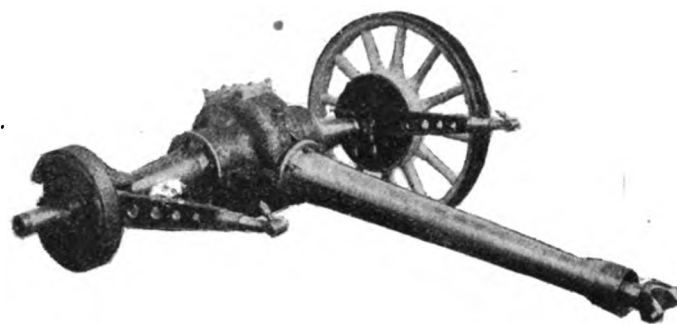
View of Cardan Shaft Casing and Rear Axle.
